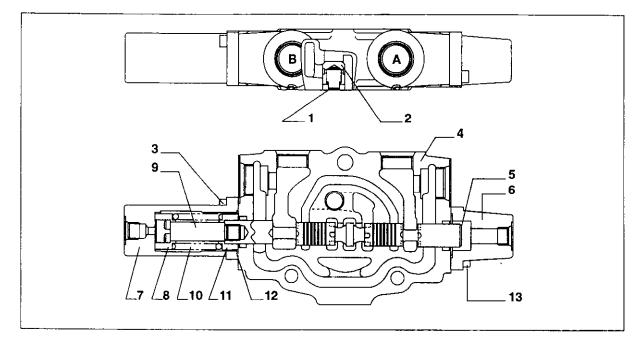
Configuration of "Auxiliary" section of control valve (piloted)
